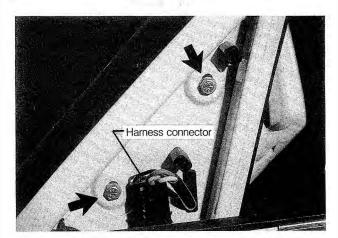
Side mirror housing mounting bolts (arrows), behind small trim panel or radio speaker.
